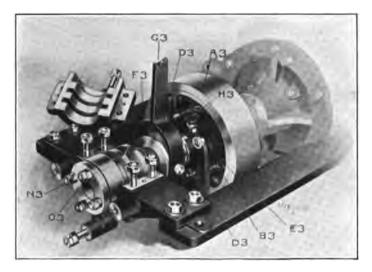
Skandia Solid Thrust Block and Clutch.
